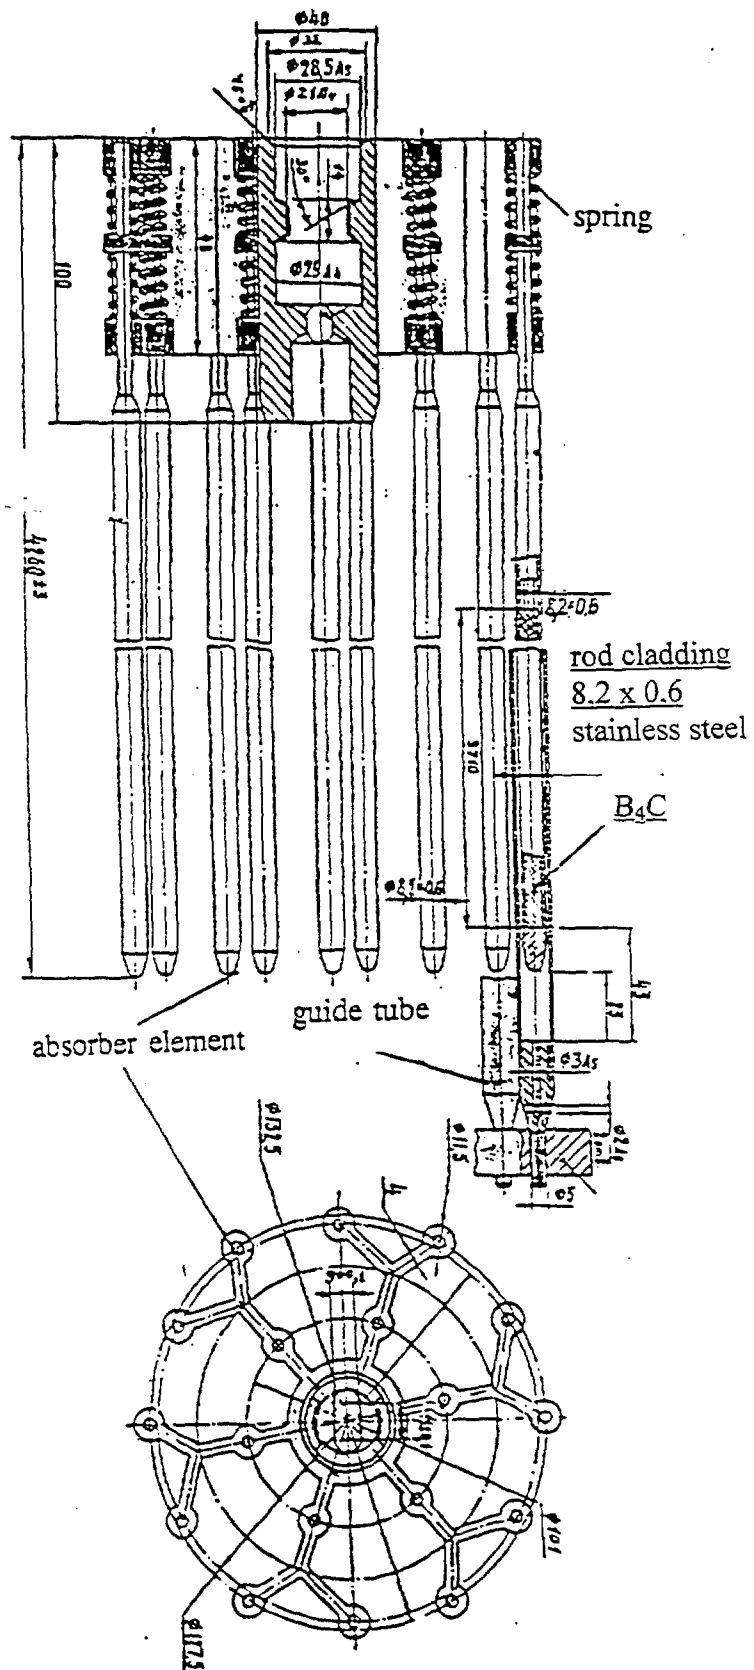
WWER-1000 Rod cluster control assembly (RCCA) design
